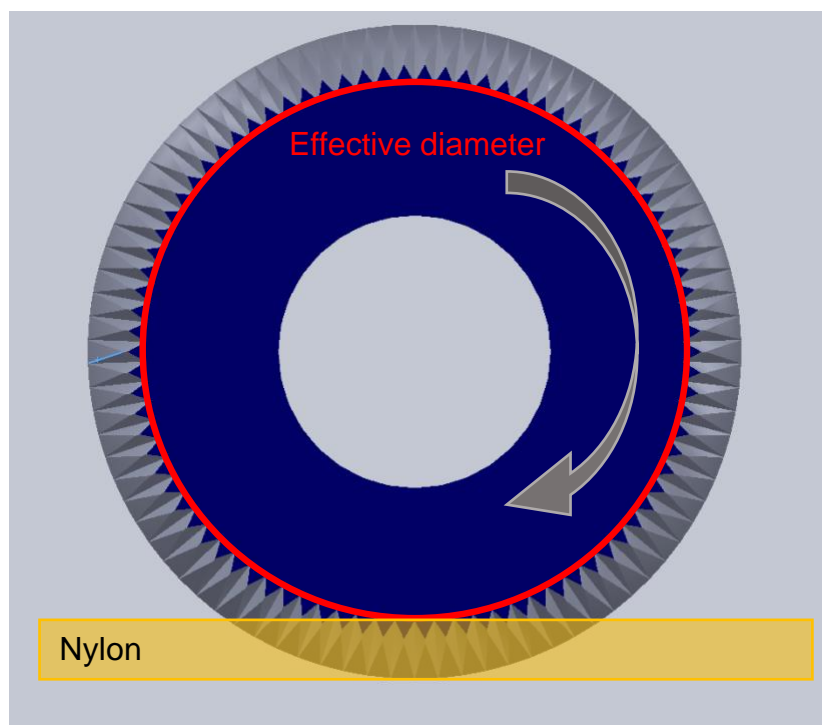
Hobbed gear cross-section and nylon filament
